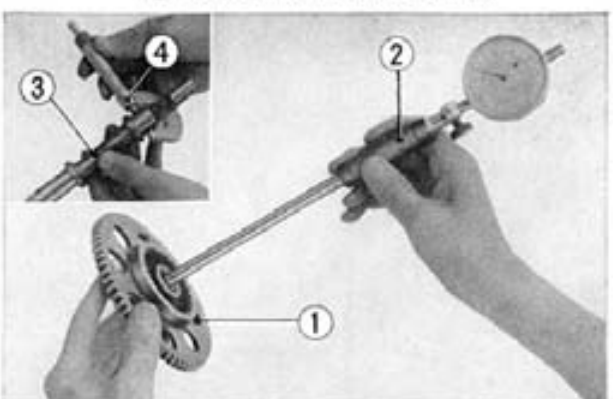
① Kick gear ③ Kick starter shaft
